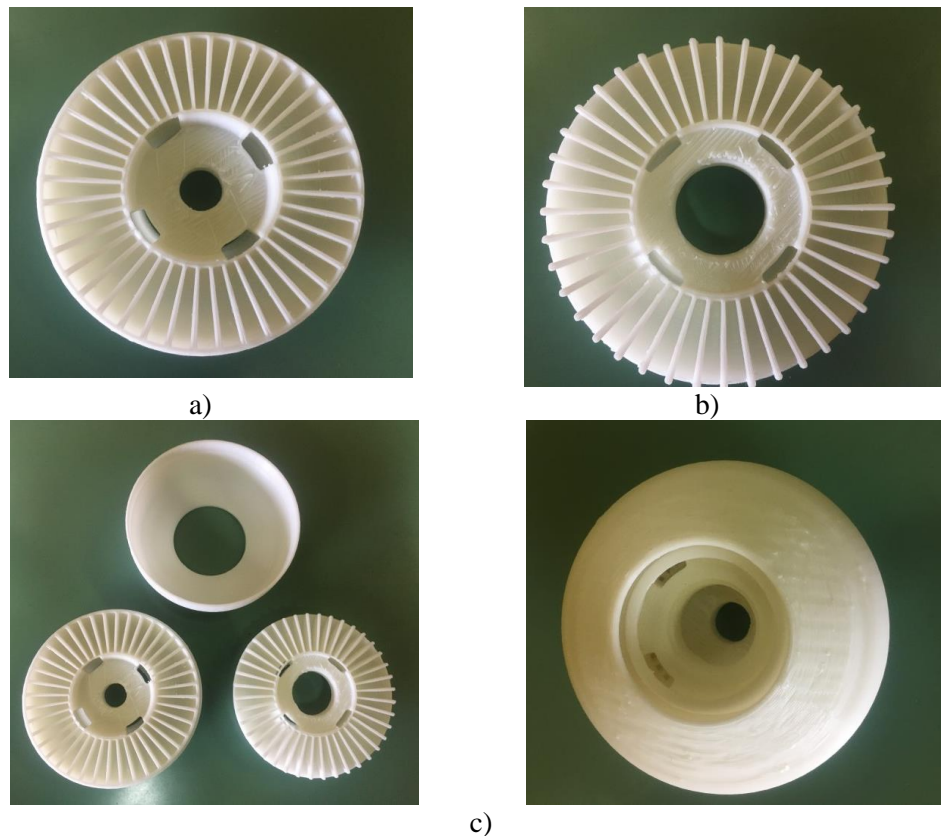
3D printing of hydrodynamic coupling a) pump wheel, b) turbine wheel and c) assembly.
